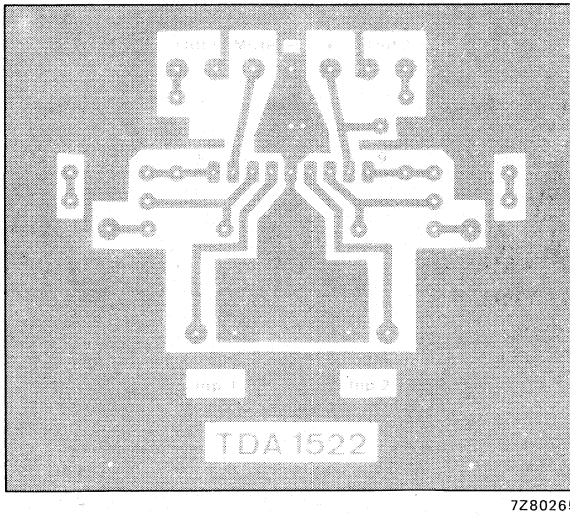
Printed-circuit board, showing track side. Dimensions 75 mm x 65 mm.
